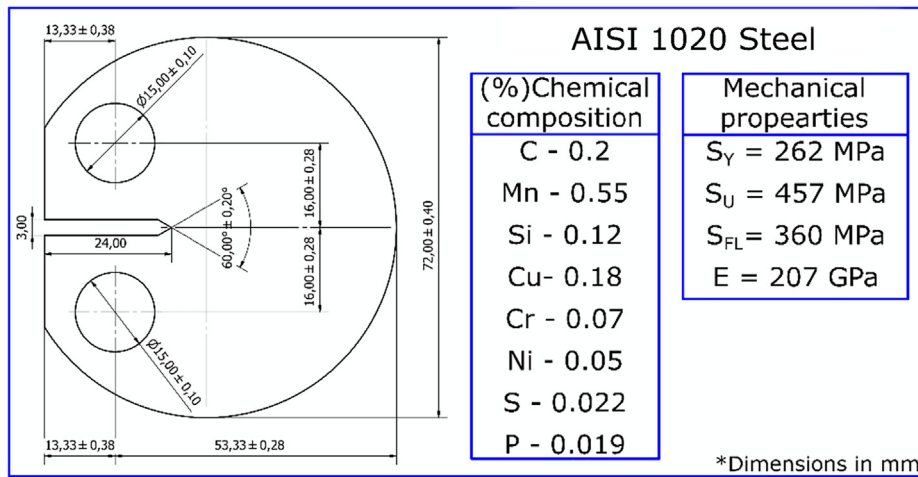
Dimensions of DC(T) specimens and chemical composition of the tested AISI 1020 steel.
